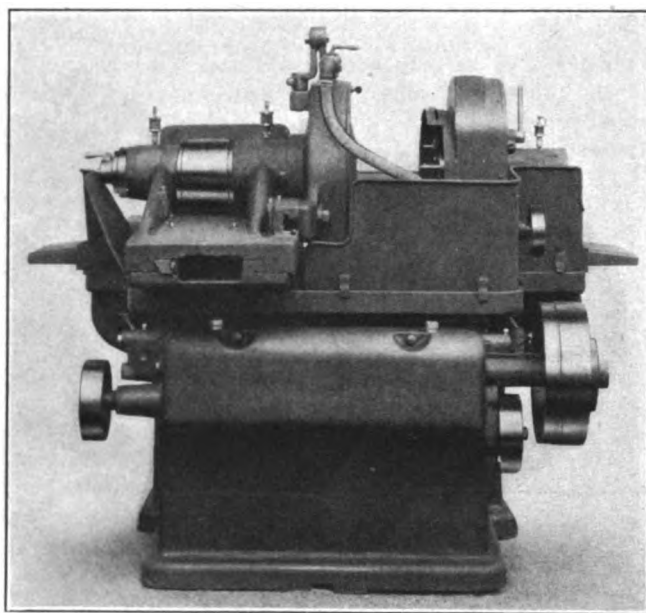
REAR VIEW OF CINCINNATI CYLINDRICAL GRINDING MACHINE
